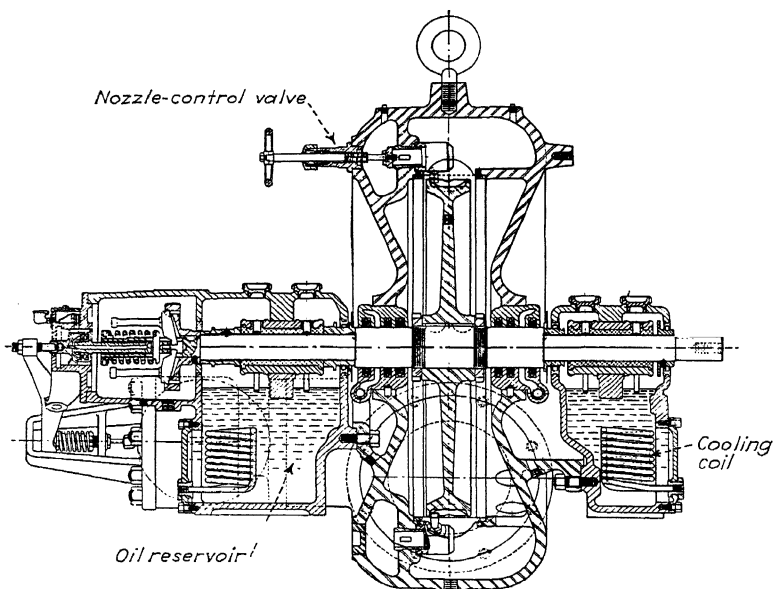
Mechanical-drive turbine for high-pressure superheated steam and equipped with water-cooled ring-oiled bearings.
